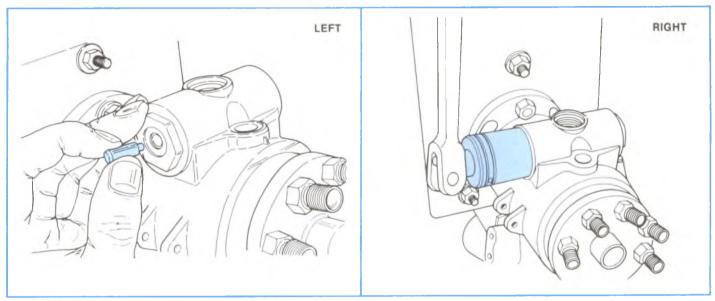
, Removing Servo Advance Plunger and Piston Hole Plug.
